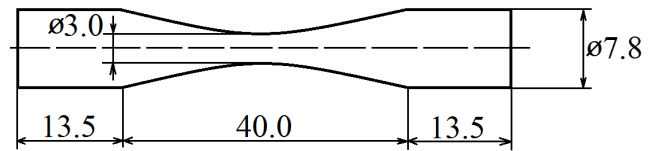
Geometry of specimens for fatigue tests. Dimensions are in mm.
